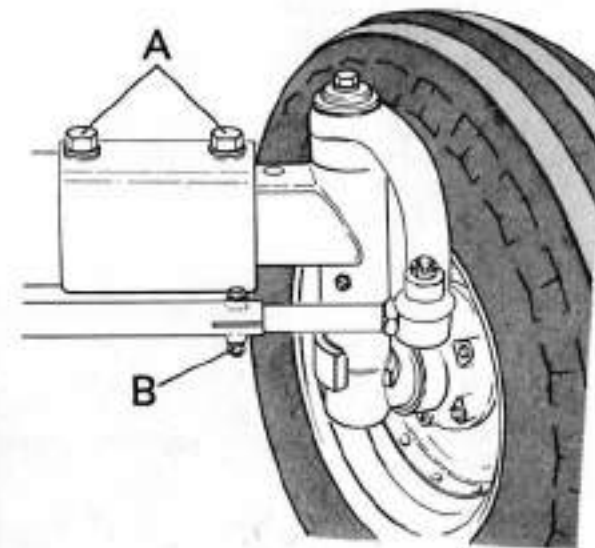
/7. FRONT AXLE TRACK ADJUSTMENT
